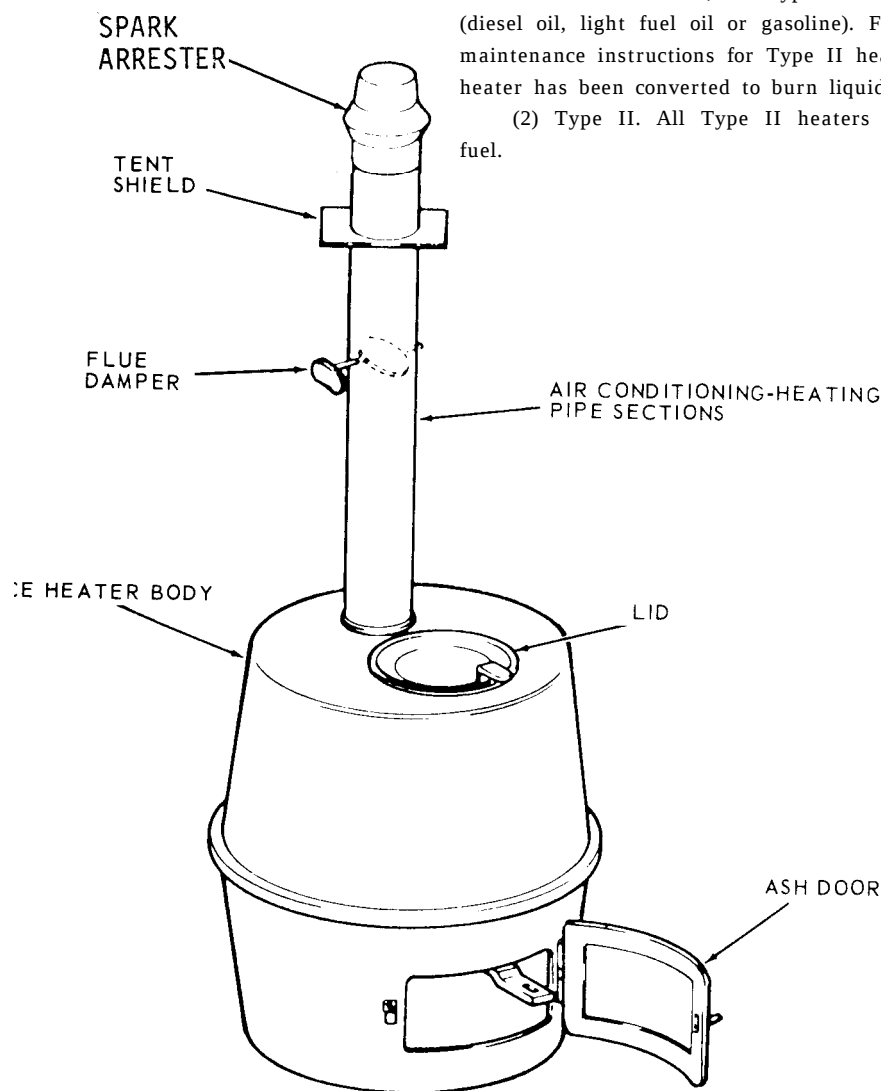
Space heater (Type I without Conversion Kit installed) (sheet 1 of 2).
